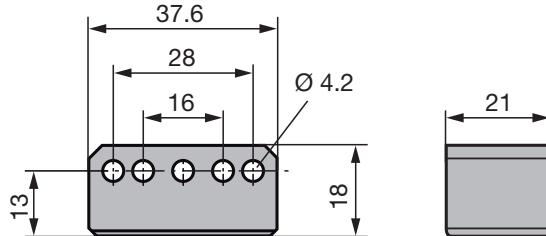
Installation dimensions of BTL6-A-3801-2 magnet
